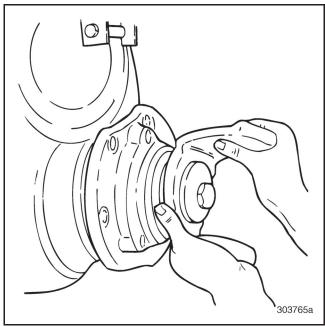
Removing Rear-Drive Shaft, Bearing Retainer and Output Yoke Assembly
